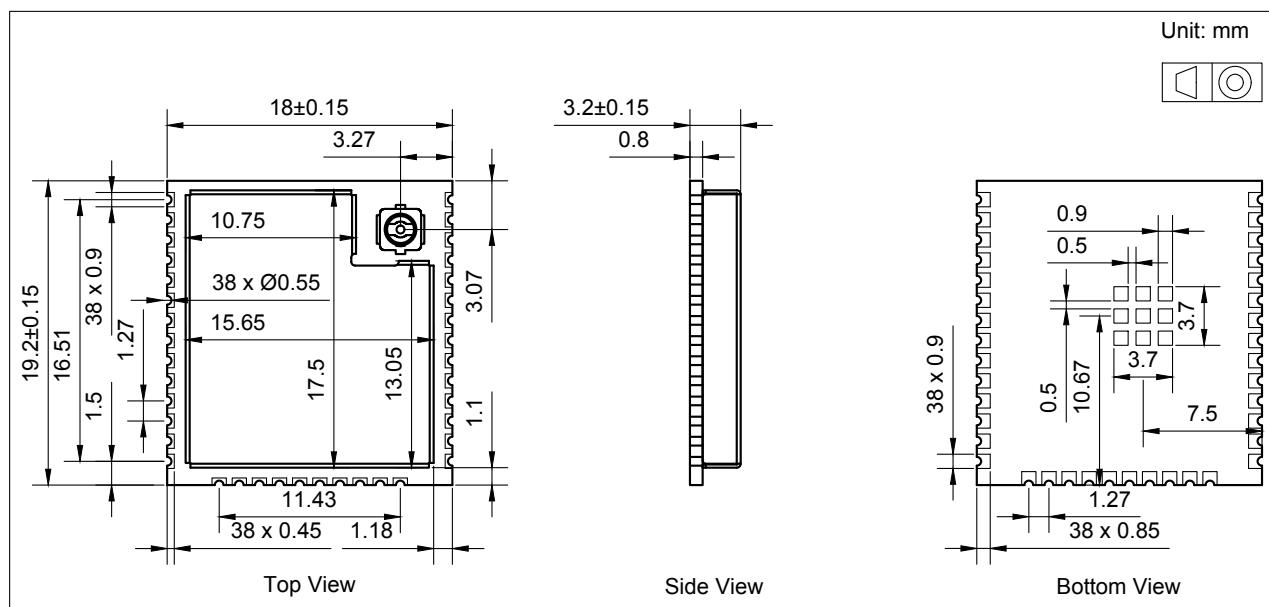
ESP32-WROOM-32UE Physical Dimensions
